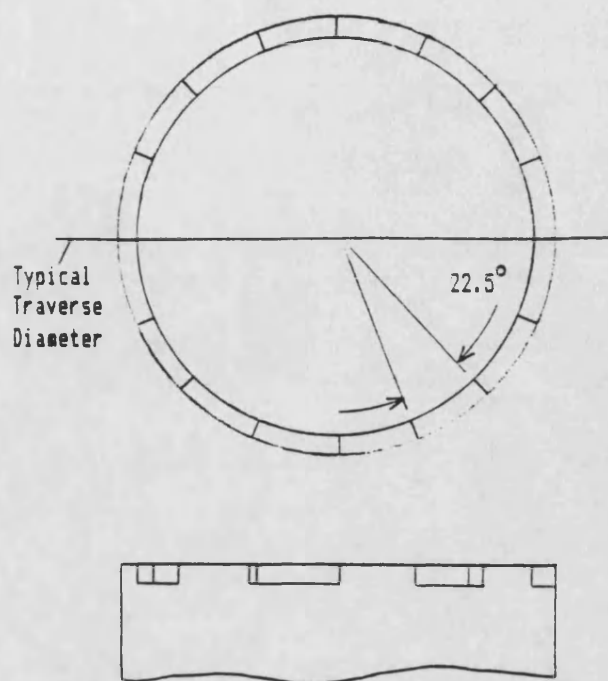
Eight Tooth Nozzle Exit Geometry
